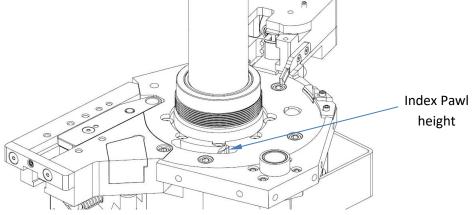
Checking Height of Index Pawl engagement - Between .060 - .100"
